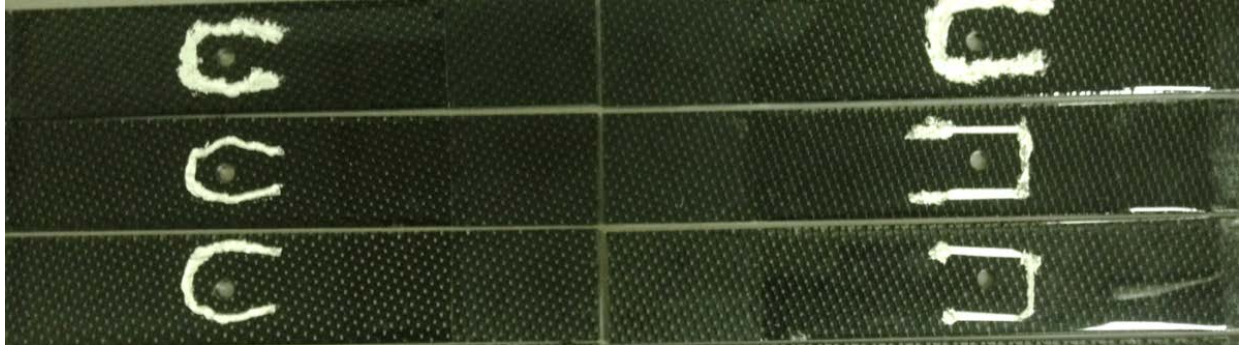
Fatigued open-hole test specimen OHF-11 smeared silver epoxy lines on cracked epoxy coating and polyester tape
